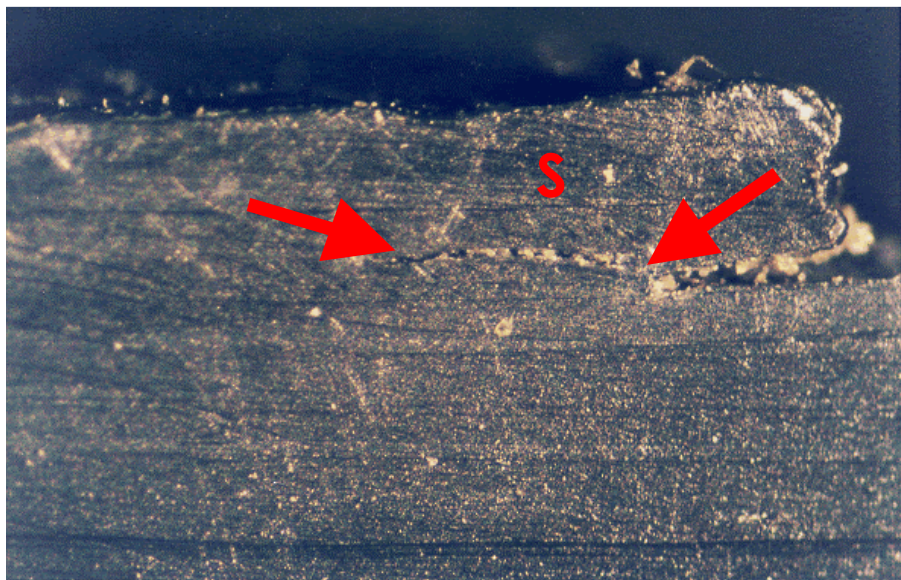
Stress crack between stud weld (S) and sheet bottom.
